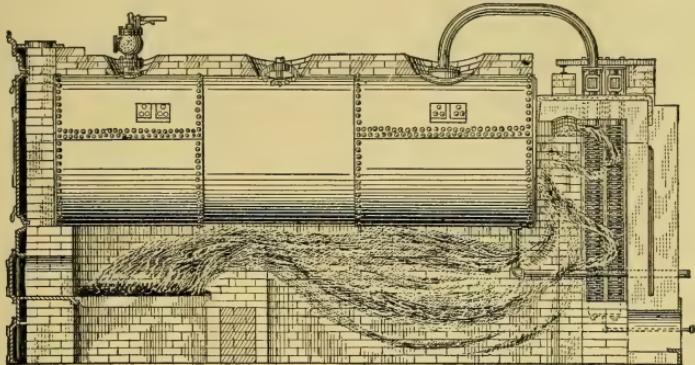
H.R.T. Boiler and Foster Superheater.
